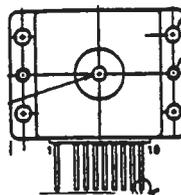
AVX-S3 input assembly (for OP-3 package)
